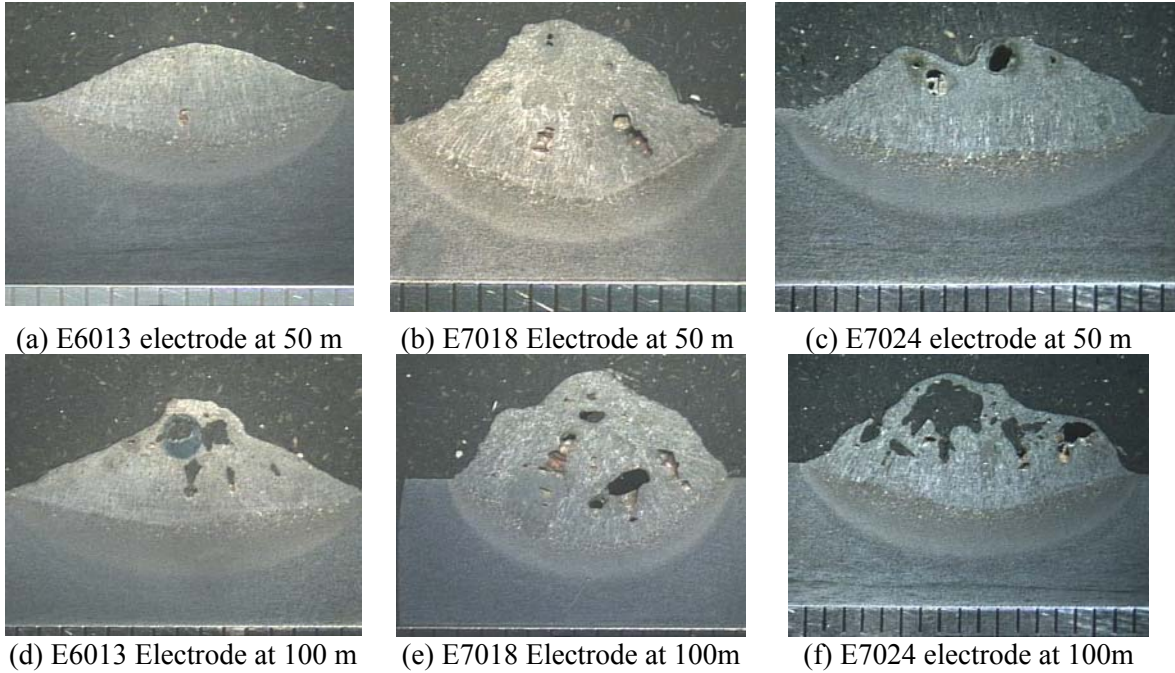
Cross-section macrographs from the center of the BOP wet welds deposited using electrode positive with the E6013, E7018 and E7024 electrodes at 50 and 100m.
